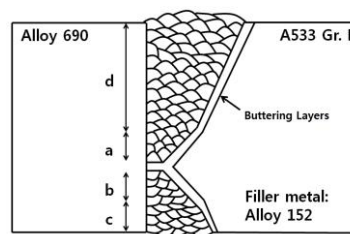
Schematic diagram of dissimilar metal weldments
